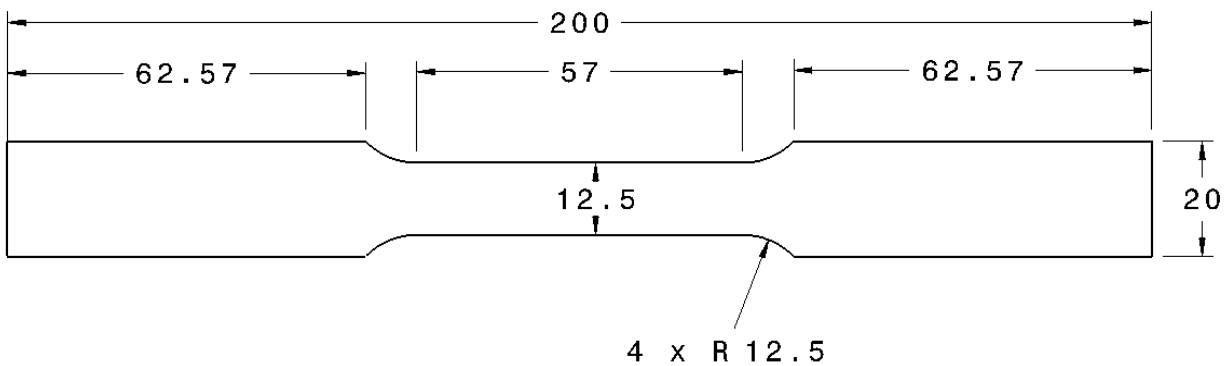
ASTM standards E8, geometry for tensile specimens (dimensions are in mm)
